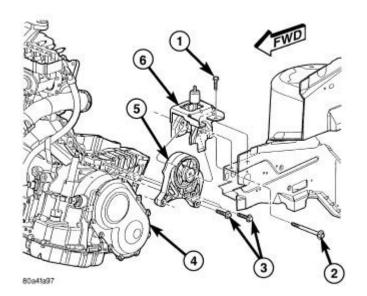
Installing Left Engine Mount Insulator (2 Of 2) Courtesy of CHRYSLER LLC
